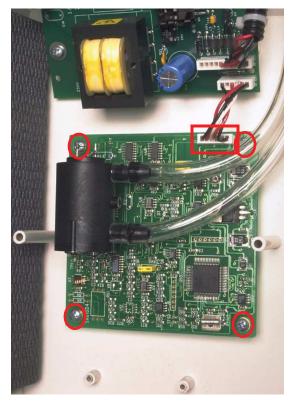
FIGURE P: CONNECTION AND MOUNTING SCREW LOCATIONS
